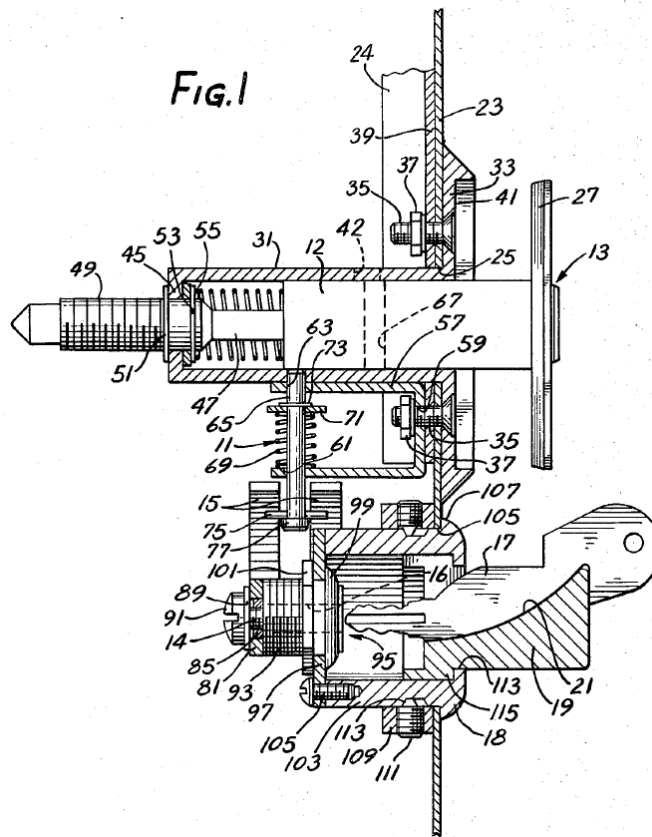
is “is a full cross sectional view of the device of the invention, shown installed with a lock in a panel.” Wiczer 1:55–56.
